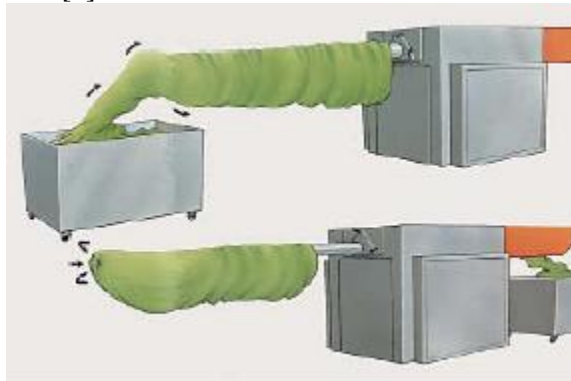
Tubular fabric turning machine from Sperotto Rimar [2]
